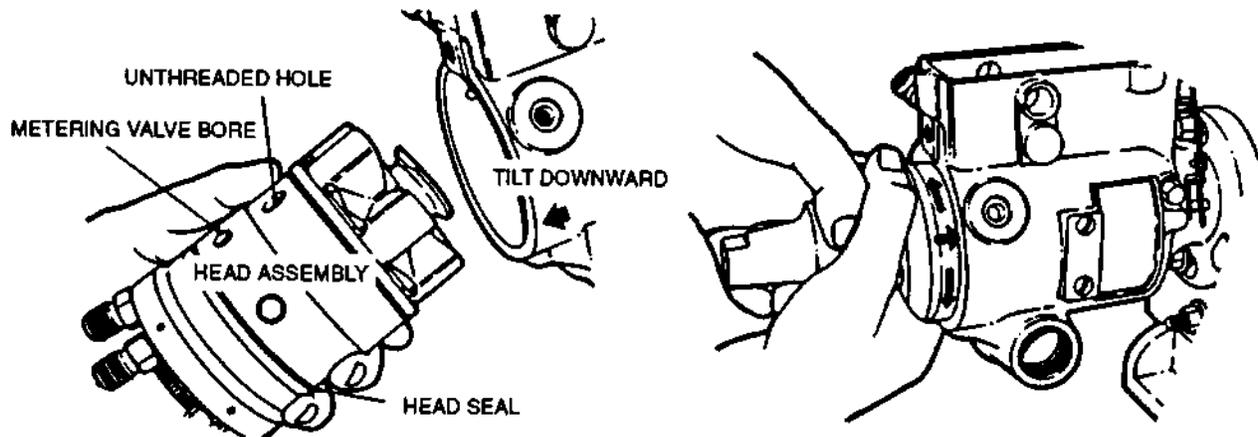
Inserting Hydraulic Head (Typical)
